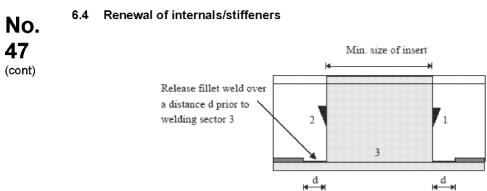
Welding sequence for inserts of stiffeners
